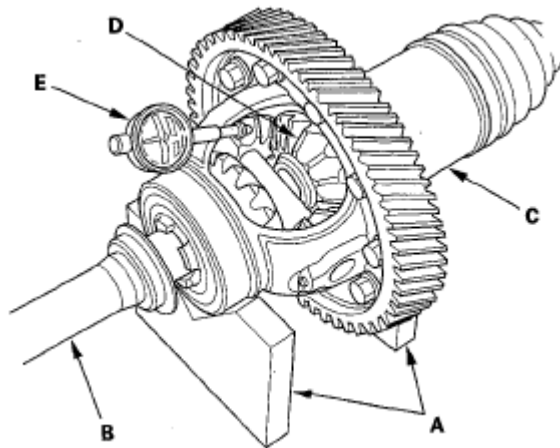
Identifying Differential Assembly On V-Blocks, Intermediate Shaft And Left Driveshaft
